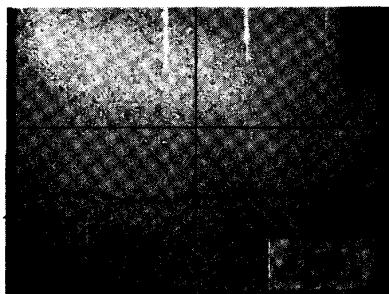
A typical fatigue crack observed in the specimen at 175°C.
